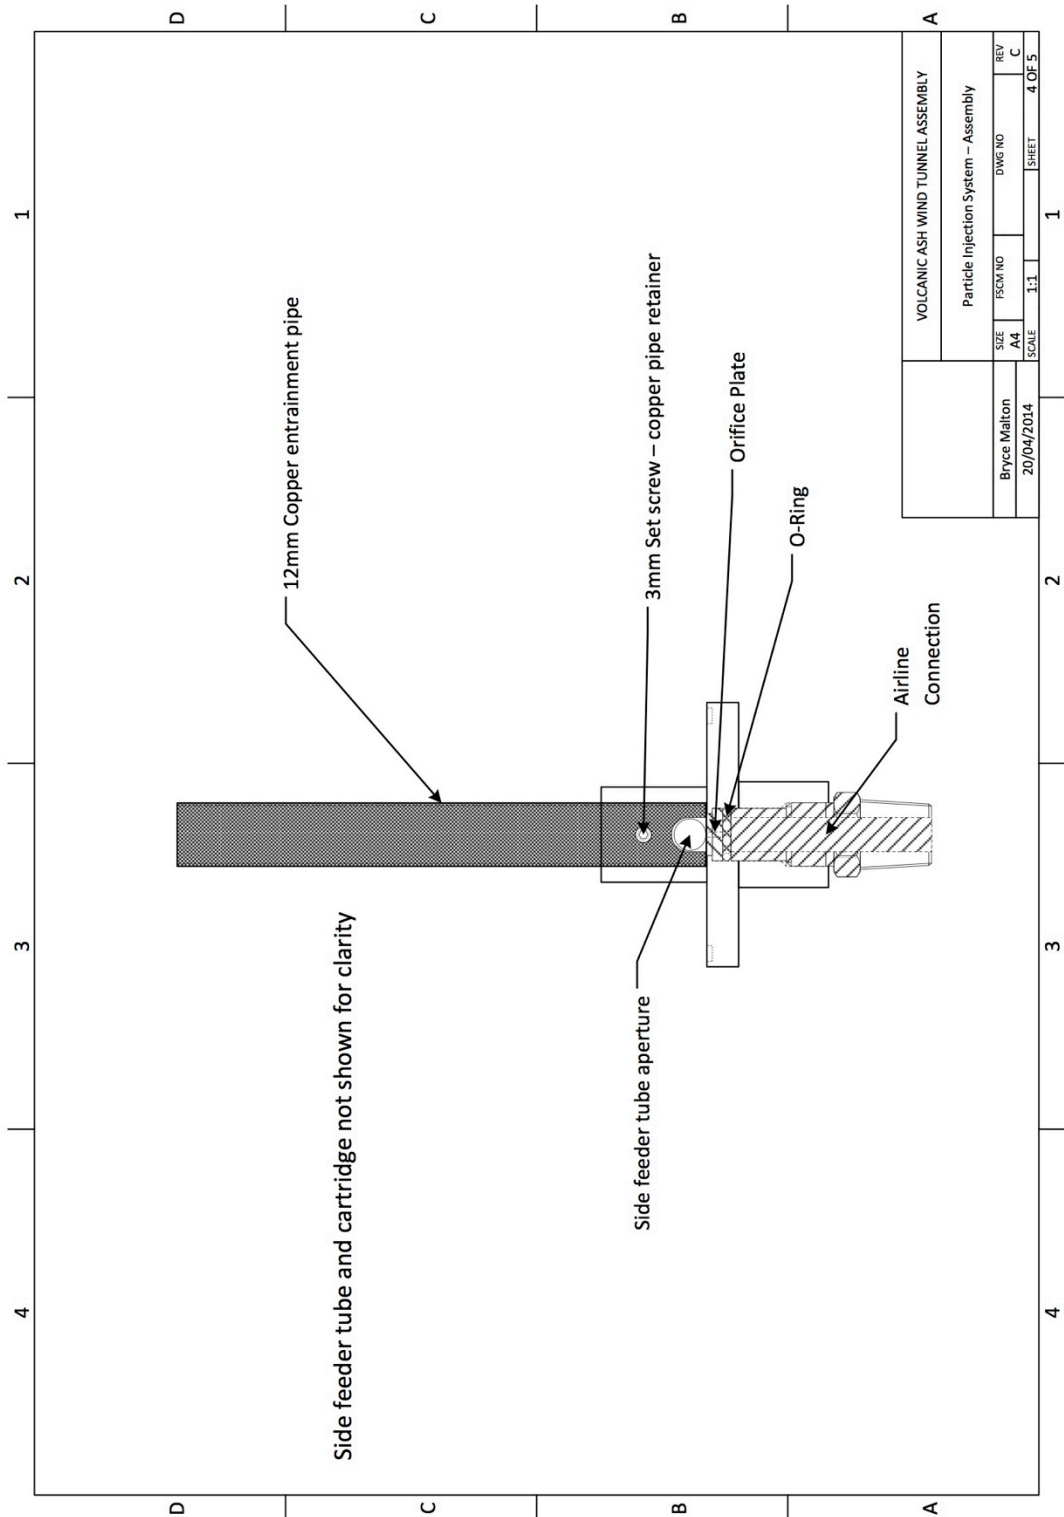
Revision 2 high-pressure air nozzle general assembly.
